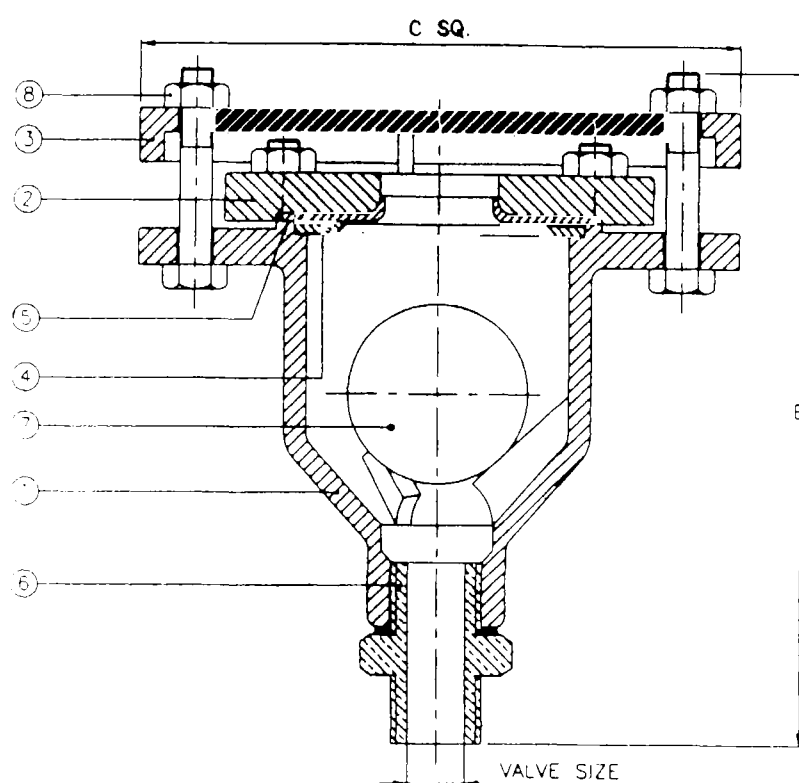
TYPICAL CROSS-SECTIONAL ARRANGEMENT FOR SINGLE AIR VALVE (SMALL ORIFICE) S 1
